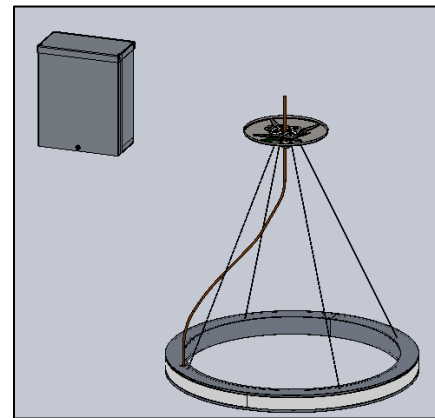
COMPLETED INSTALLATION OF REV PENDANT WITH P1EU HANGING SYSTEM RV2 (OUTER ILLUMINATION) (SHOWN)
